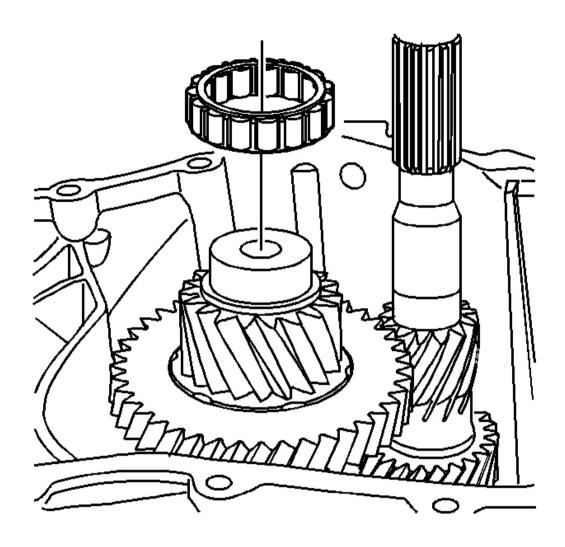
Roller Bearing & Output Shaft Courtesy of GENERAL MOTORS CORP.
